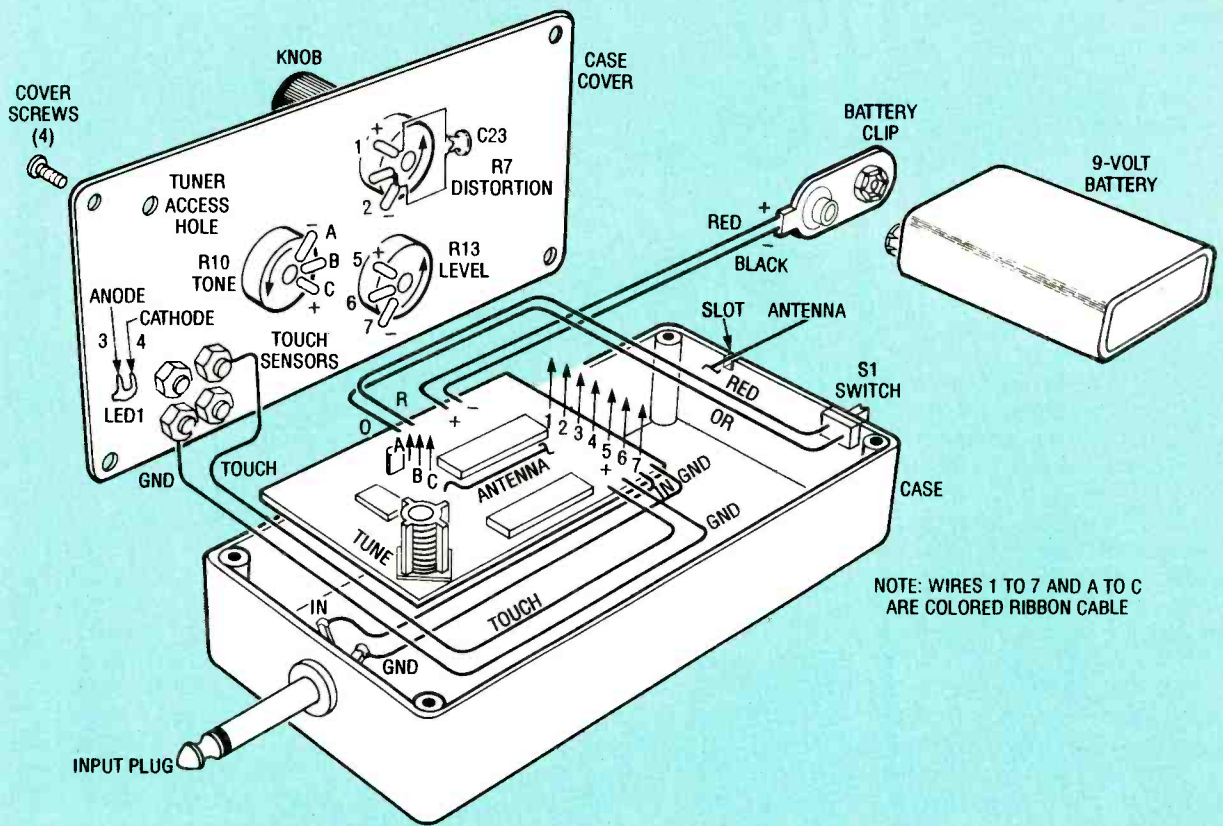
EXPLODED VIEW OF THE TRANSMITTER showing the locations of the off-board components and wiring. The input plug attaches the transmitter to the guitar.
